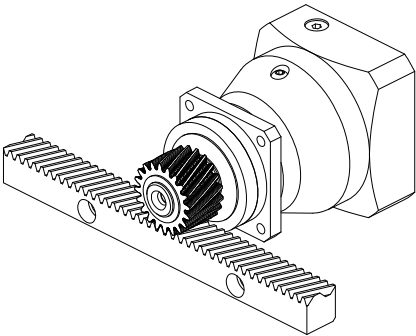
Recommendation for bearing assignment D (e.g. for helical gearing)
